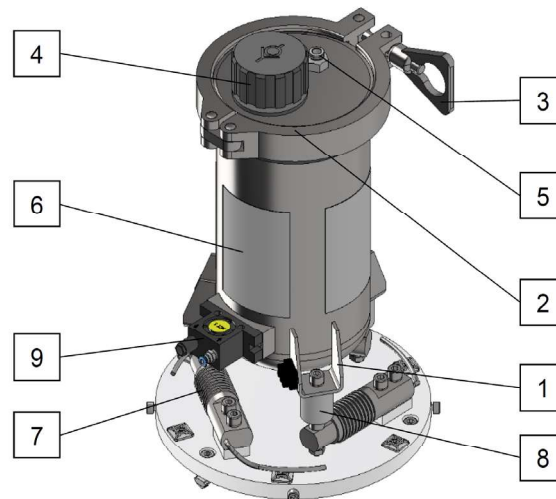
3D model of the dust dosing module (view without casing): 1 – tank; 2 – cover; 3 – clasp; 4 – breather valve; 5 – suction connection; 6 – heater; 7 – weighing sensor; 8 – vibration isolator; 9 – vibrator
